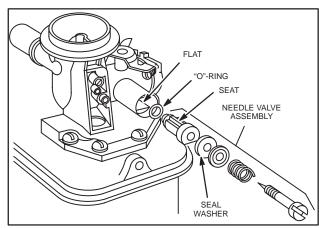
NEEDLE VALVE ASSEMBLY, PRESSED-IN TYPE
